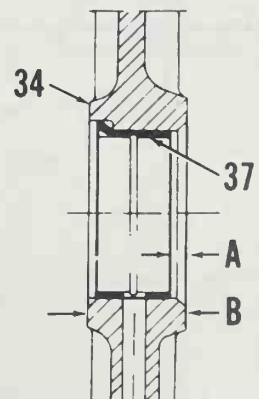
Depth (A) of bearing (37) in end support (34) should be 5 mm. Support width measured at (B) is 33.90-33.95 mm.
